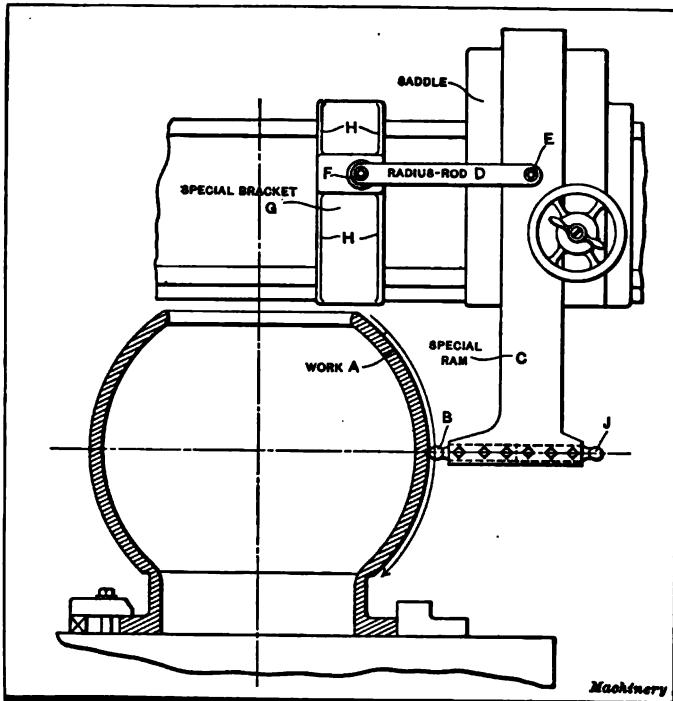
Spherical Turning Attachment for Vertical Boring Mill.
